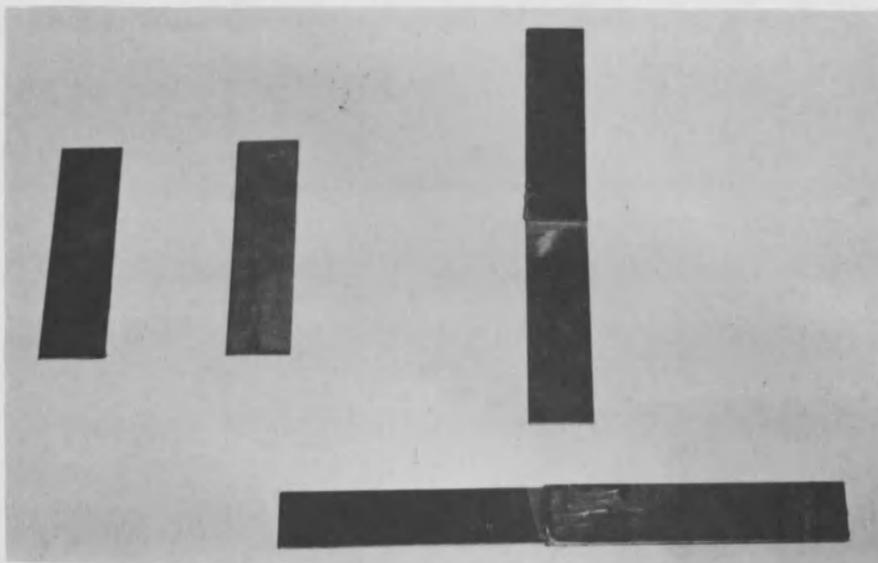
LAP TENSILE SHEAR SPECIMENS
